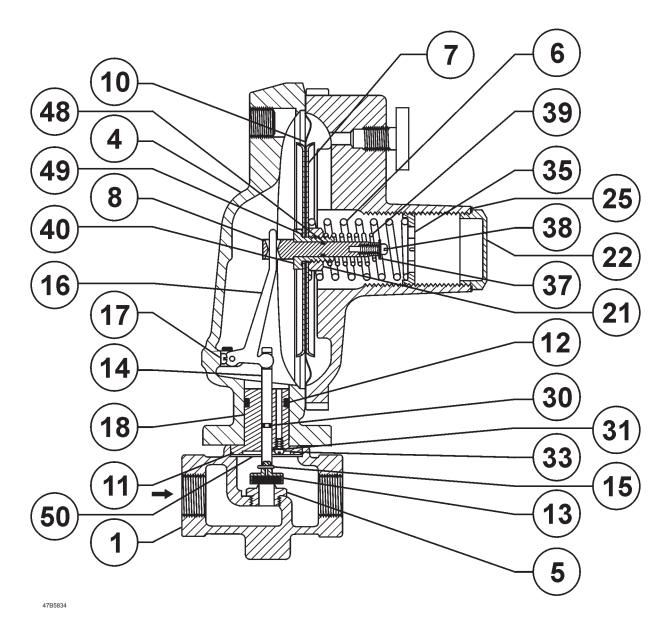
Type Y690AM or Y690AHM Regulator Assembly
